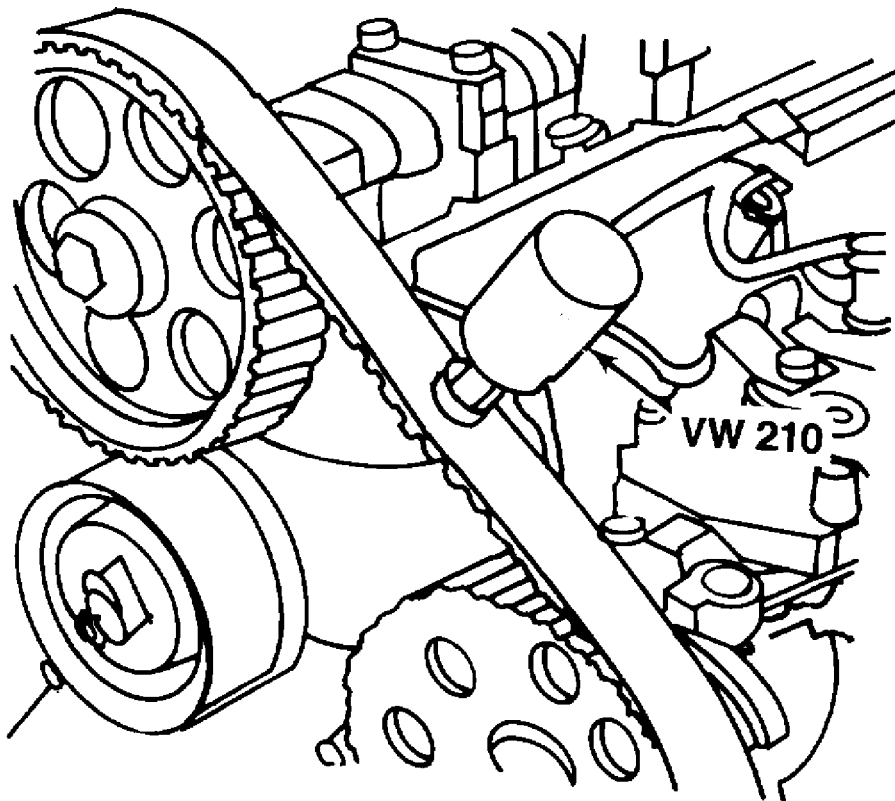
Aligning Camshaft Locking Bar (2065A)
